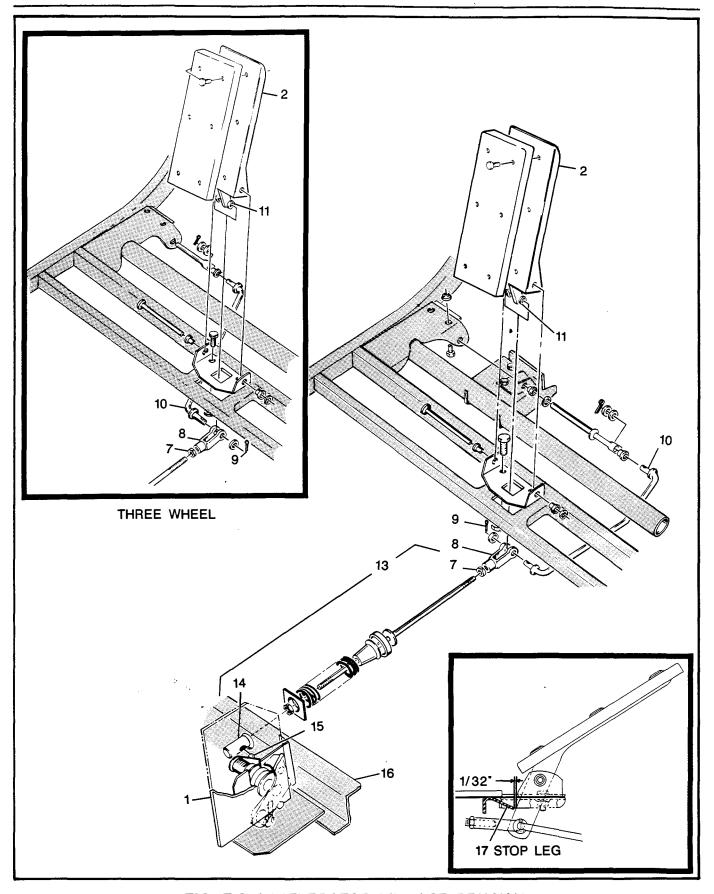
ACCELERATOR LINKAGE REMOVAL
